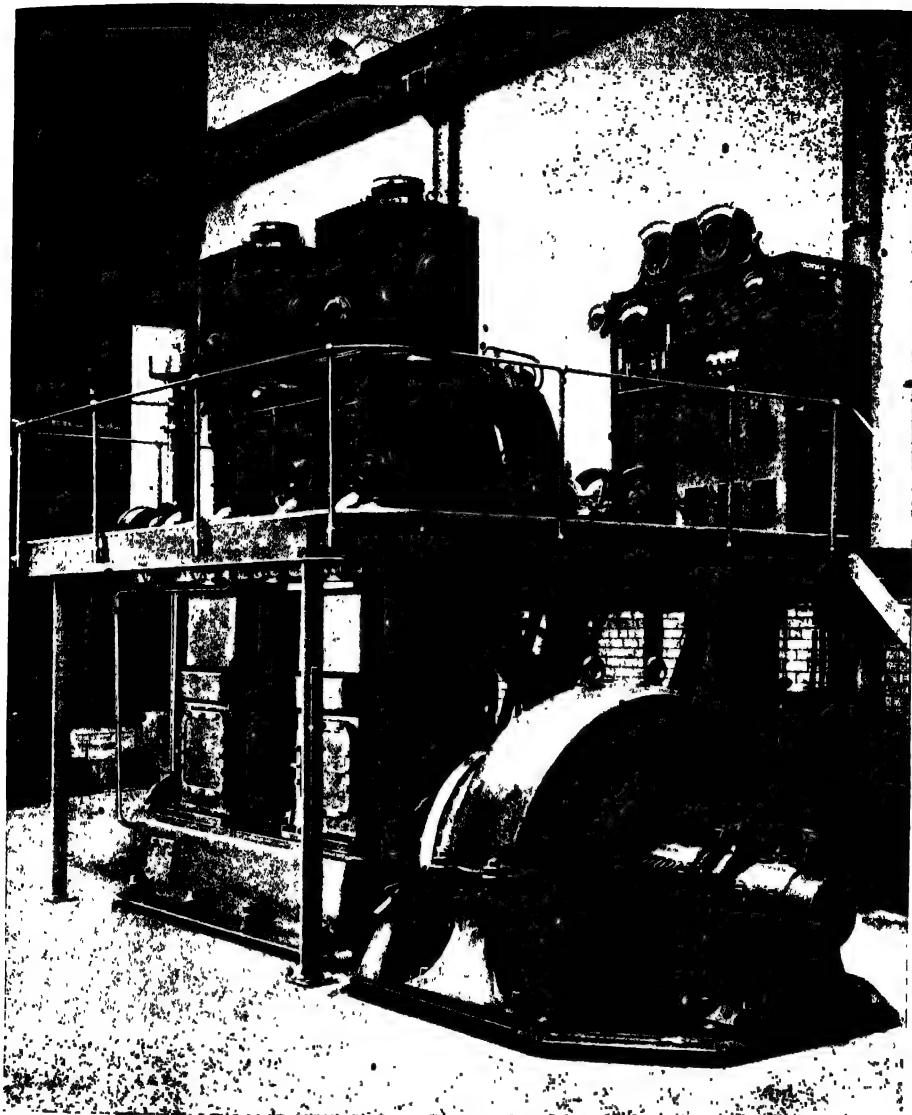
Fullagar Engine. Bore, 12 inches; stroke, 18 inches
